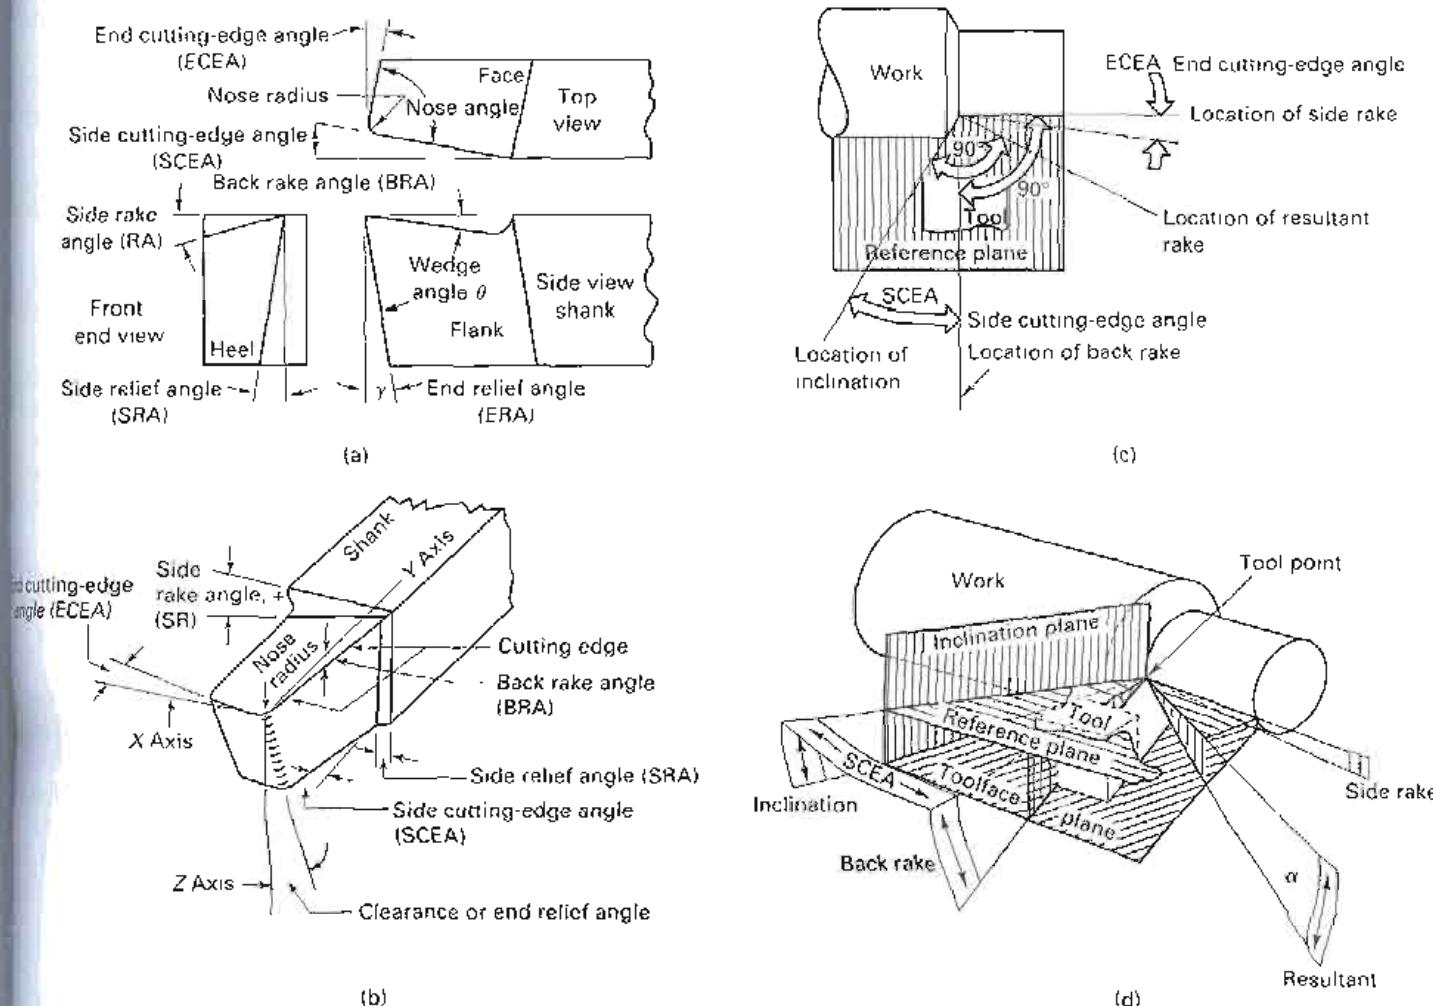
Standard terminology to describe the geometry of single-point tools: (a) three dimensional views of tool, (b) oblique view of tool from cutting edge, (c) top view of turning with single-point tool, (d) oblique view from shank end of single-point turning tool.
